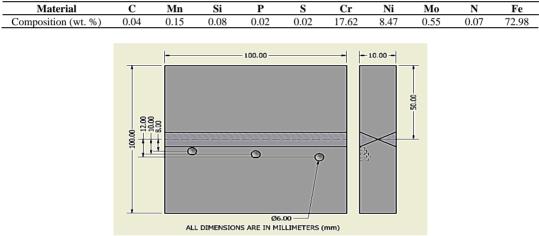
Double-Sided Half V-Groove Weld Joint sample
